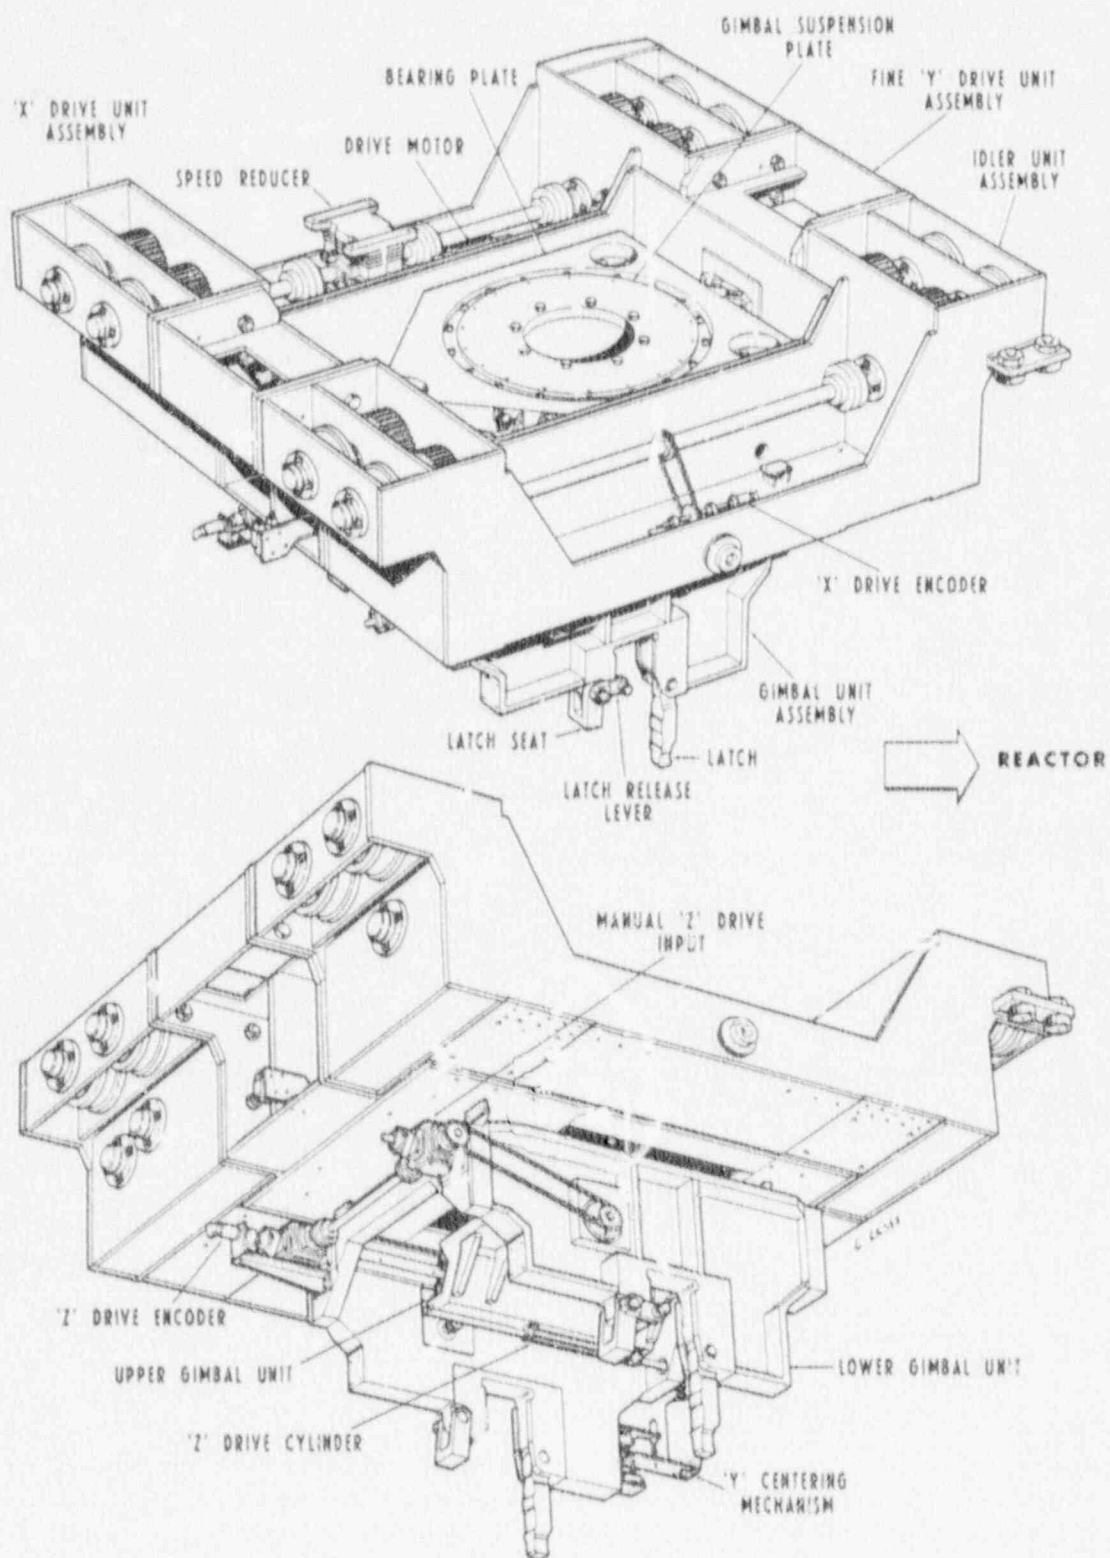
FUELING MACHINE CARRIAGE ASSEMBLY
